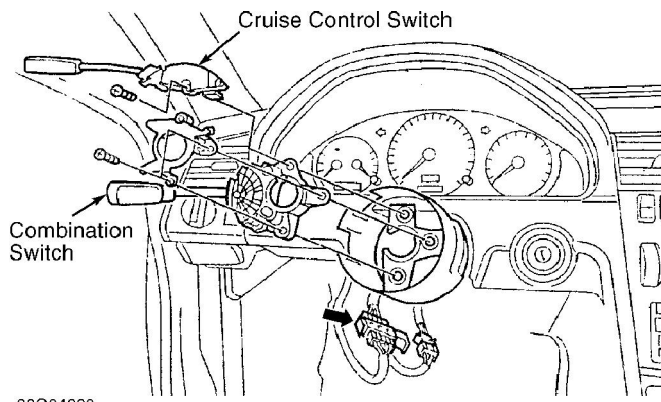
Identifying Combination Switch & Steering Components (Typical)
